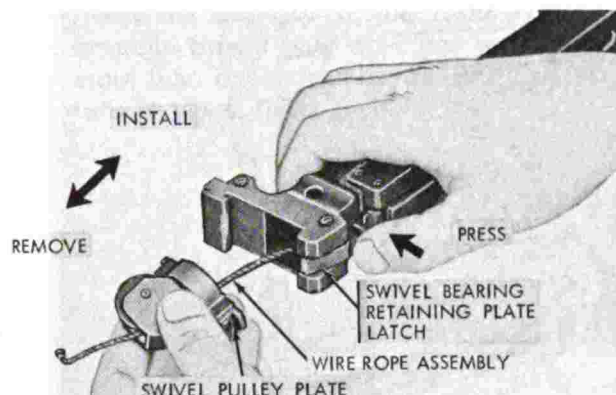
Disassembly/assembly of back plate assembly (M45, M48).
